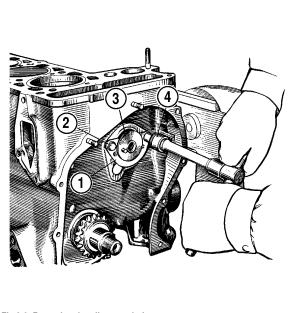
Removing the oil pump shaft: 1 - thrust flange; 2 - flange securing bolt; 3 - oil pump shaft; 4 - wrench
